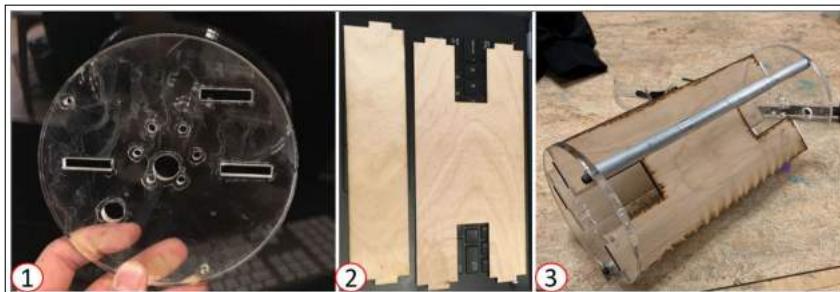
Chassis - Initial Prototype. Pictures 1 and 2 show PLA and wood components, respectively.
